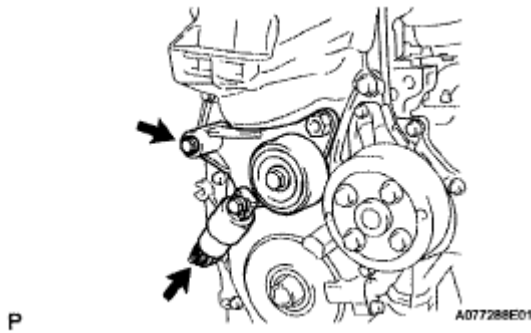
Locating V-Ribbed Belt Tensioner And Bolt
